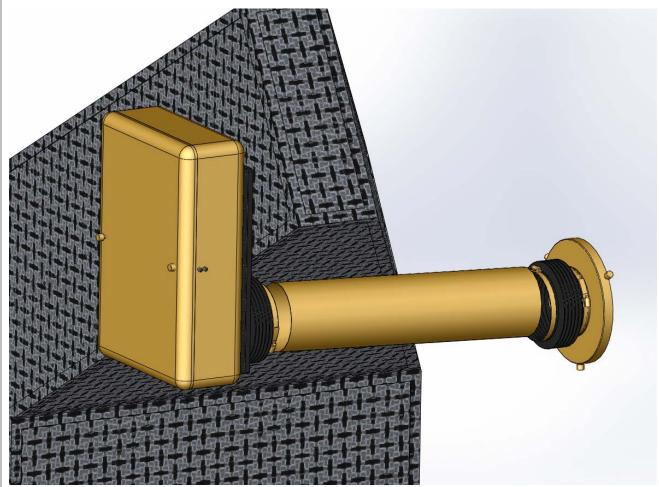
Optical Lever Receiver Enclosure(right-hand version shown, left-hand version is similar).
